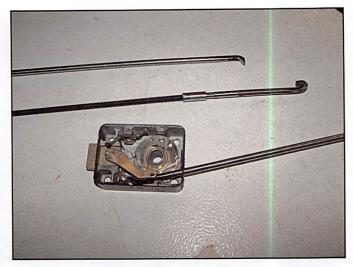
shows the tool in the lock made from air hardening drill rod with a screwdriver handle used to pry the lever into the drive cam gate. The bent end of the tool was sharpened parallel to the shaft of the tool. A second tool is sharpened in the opposite direction or 90 degrees to the tool used. The puller rod tool is between the lock and the second tool. Normally the puller would be used to grab the strap of the lock bolt extension either below or above the lock, depending on how the safe was produced.
